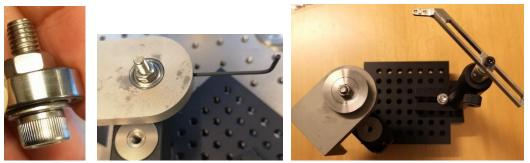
Bearing (left) mounted on Wheel Holder (middle) and Top view of the Running Wheel before mounting the wheel itself (right).
